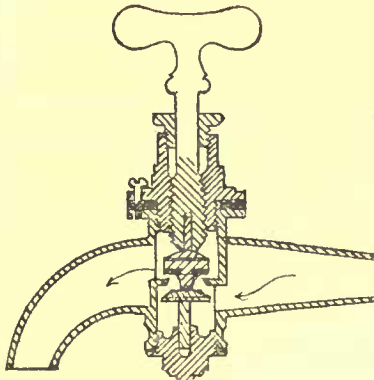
"Hand-closing" Compression-cock with double Valve.
